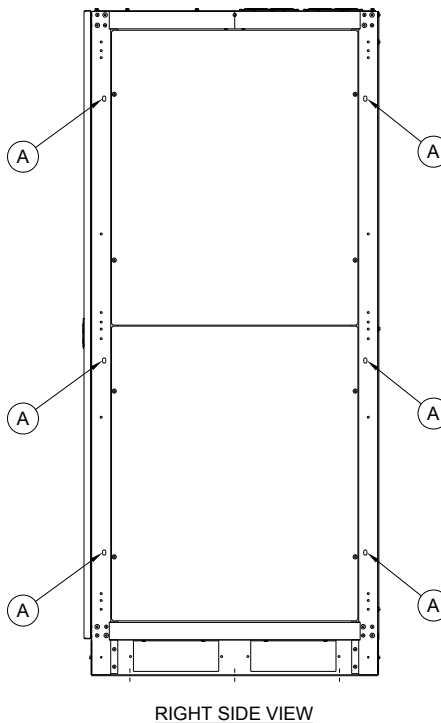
Cabinet to Cabinet Mounting Hole Locations
